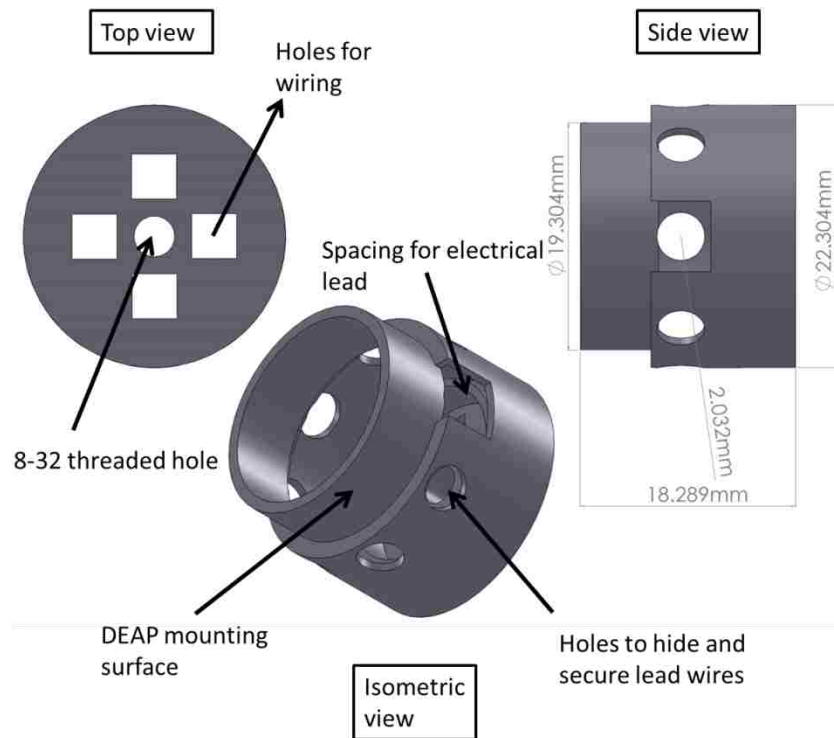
Different CAD views of a typical end mount with descriptions and dimensions of its main features.
